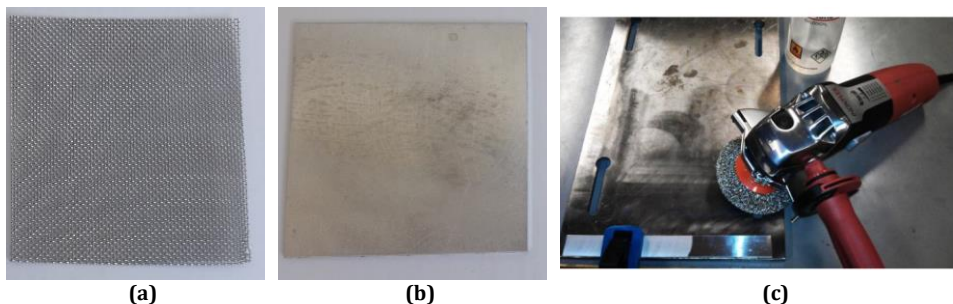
a) 304 stainless steel mesh, b) pure aluminum 1050, and c) sample preparation for the drawing process
